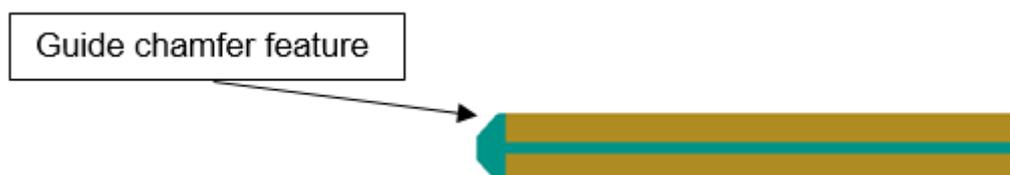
Recommended guide chamfer feature(2.0*2.0mm) view of Laminated Mating Bus Bar Board
